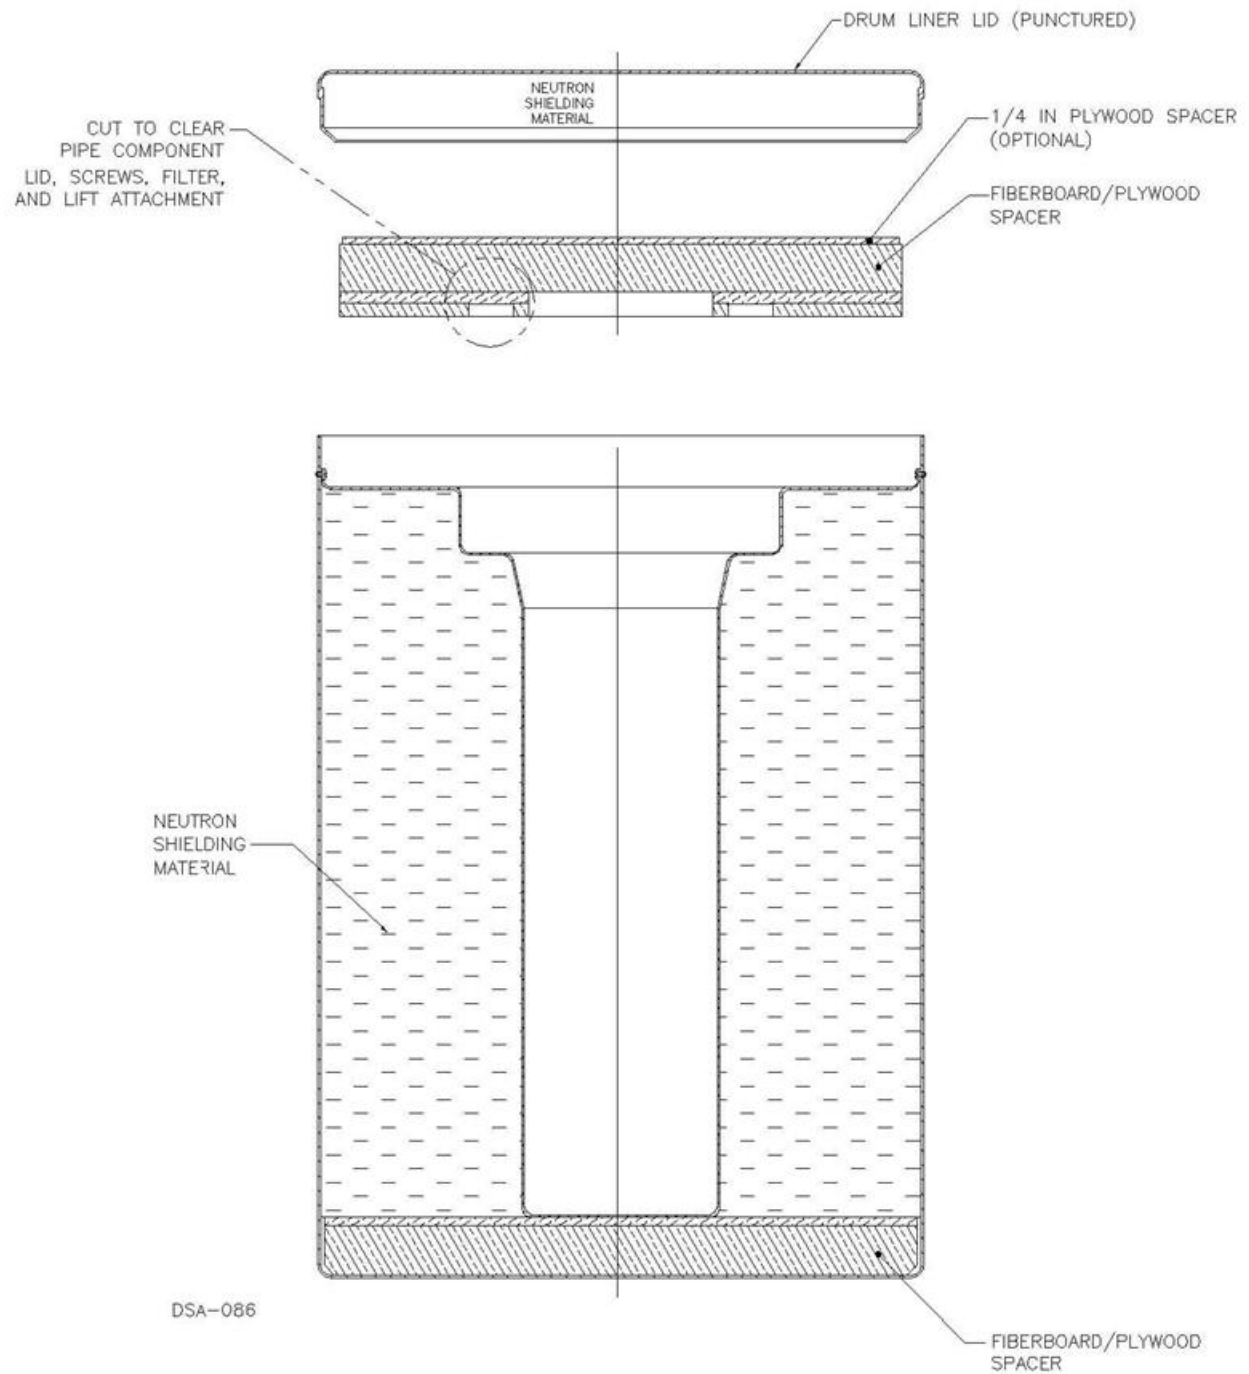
S300 Pipe Overpack Shield Insert
